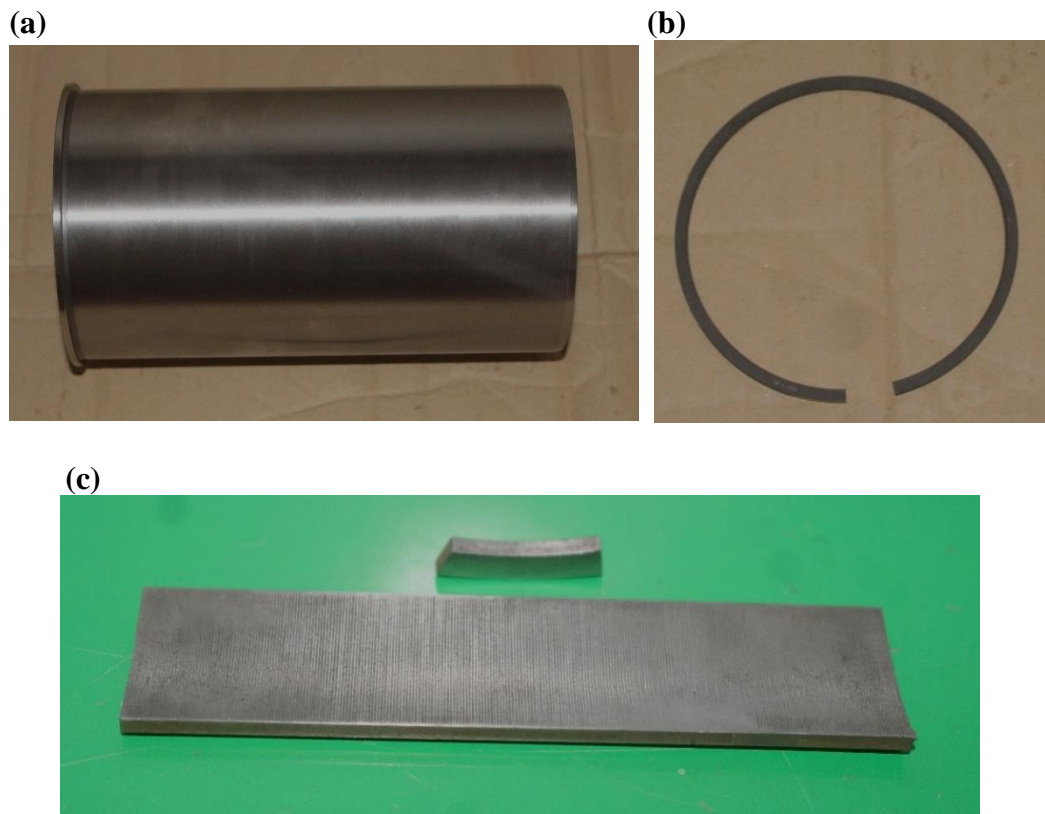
Extraction of piston ring and cylinder liner specimen (a) actual cylinder liner (b) actual piston ring (c) extracted piston ring segment and extracted cylinder liner specimen
